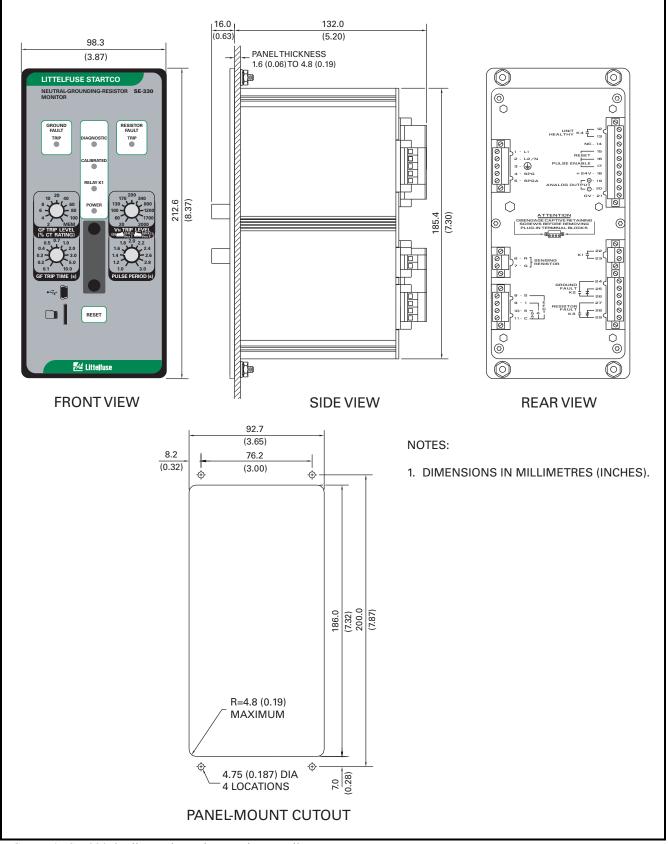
SE-330 Outline and Panel-Mounting Details.
